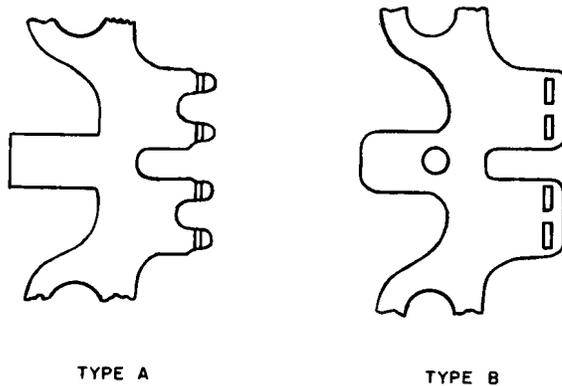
Crosspoint Contact Multiples Used on Crossbar Switches—Types A and B
